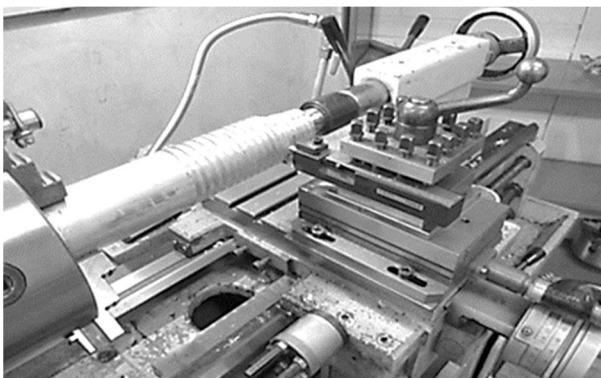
Dynamometer, workpiece and tool setting in orthogonal machining
